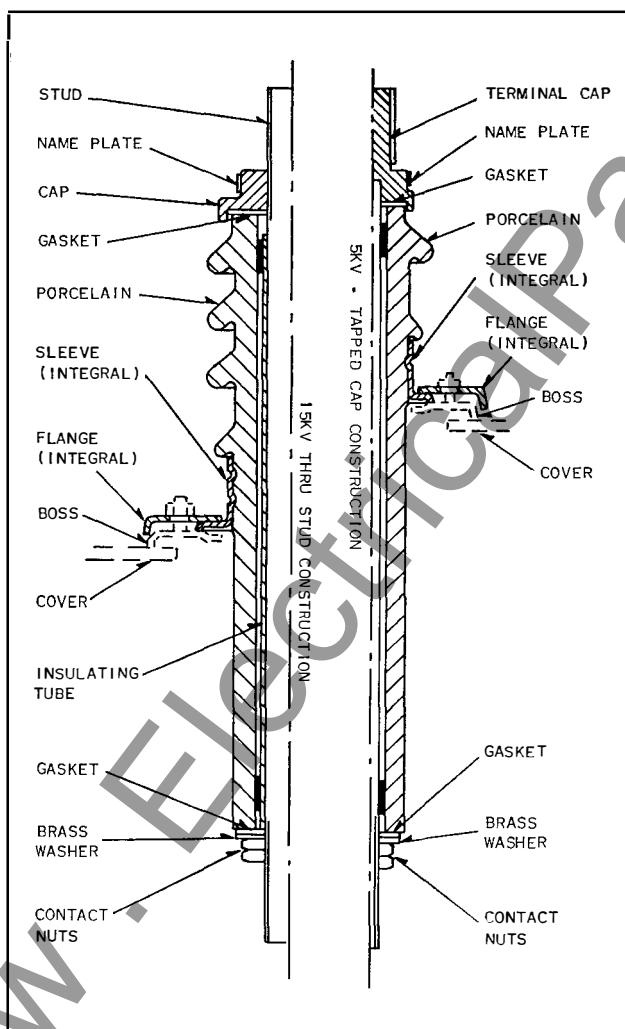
Sections of Typical "RJ" Bulk Type Bushings: Right Section, 5-KV Tapped Cap Construction; Left Section, 15-KV Through Stud Construction.
